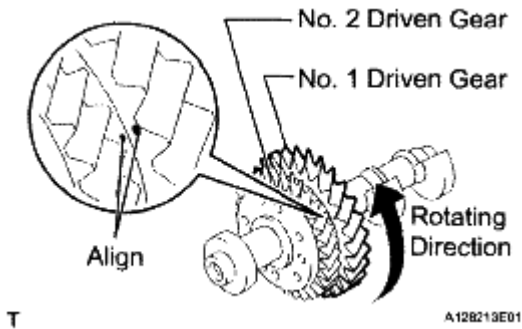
Rotating No. 1 Driven Gear Of No. 1 Balanceshaft In Rotating Direction
